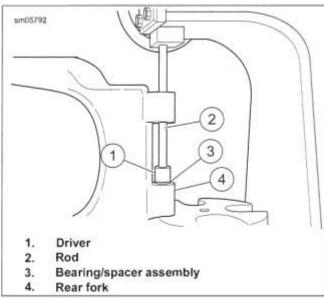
Remove Rear Fork Bearing Disassemble Pivot Shaft/Mount
